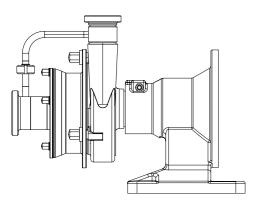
Incomplete machine: Pump without motor, exemplary of model KF
